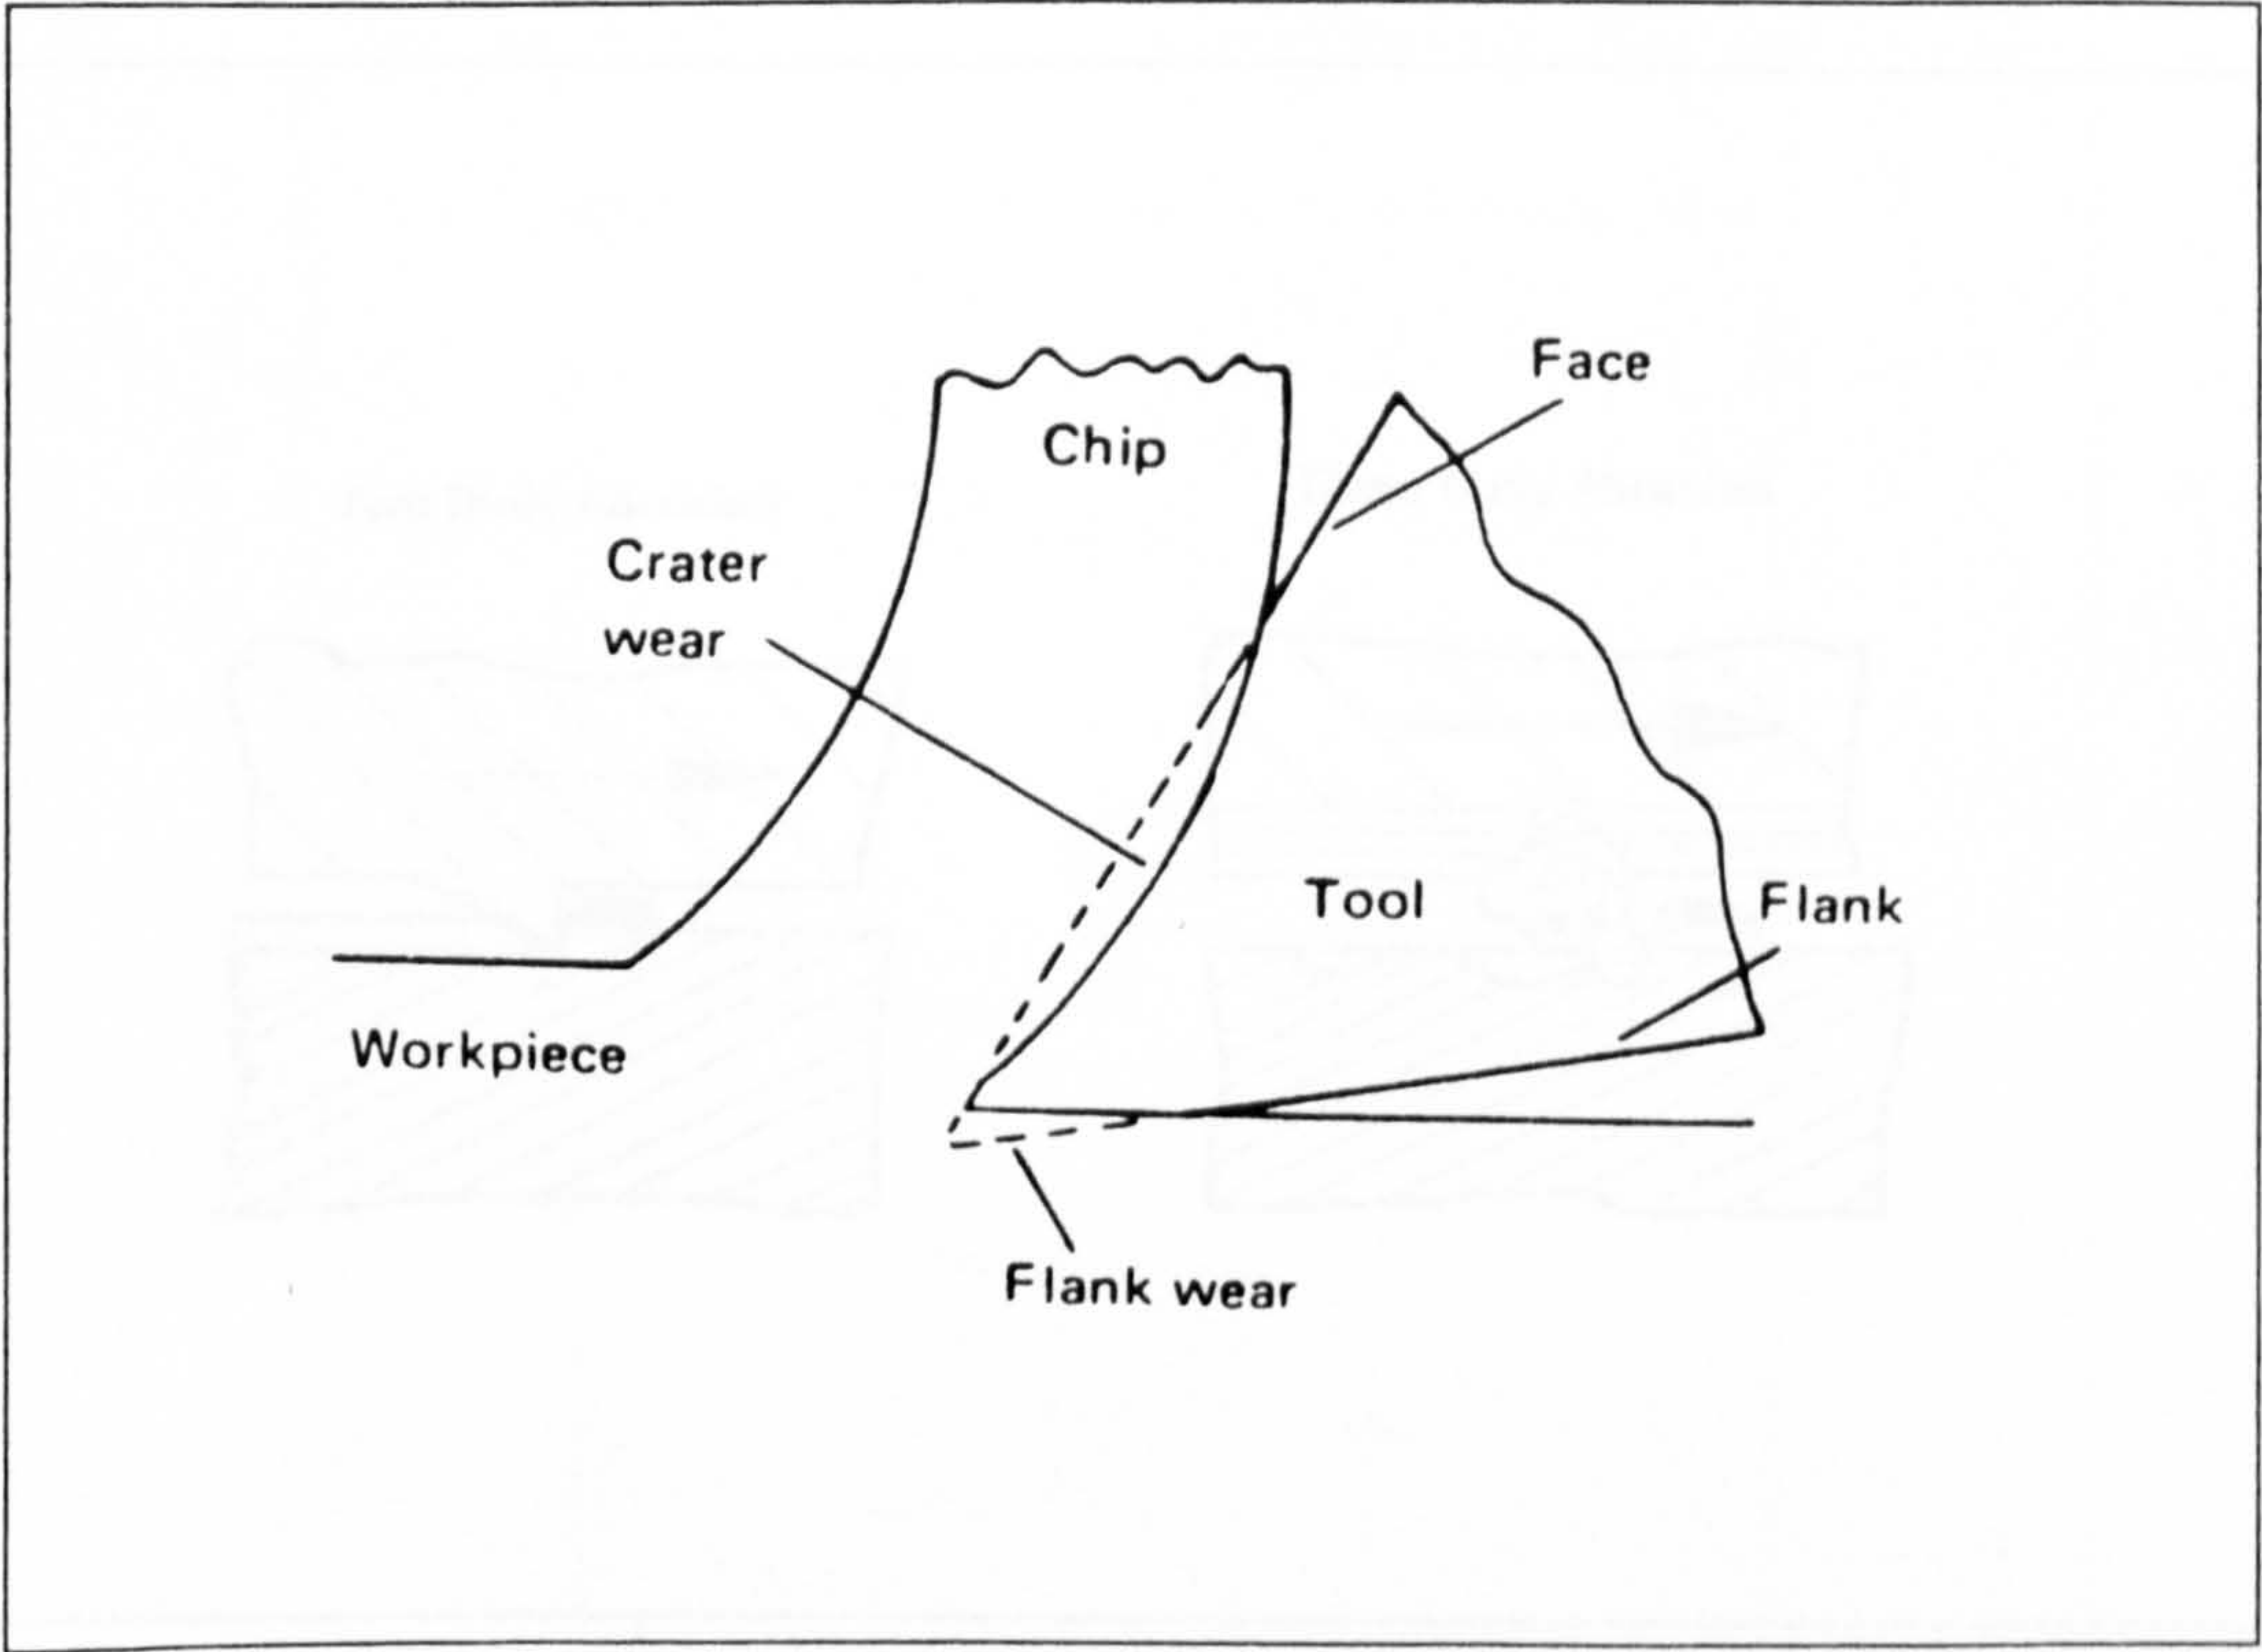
Regions Of Tool Wear In Single Point Cutting Tool [17]
